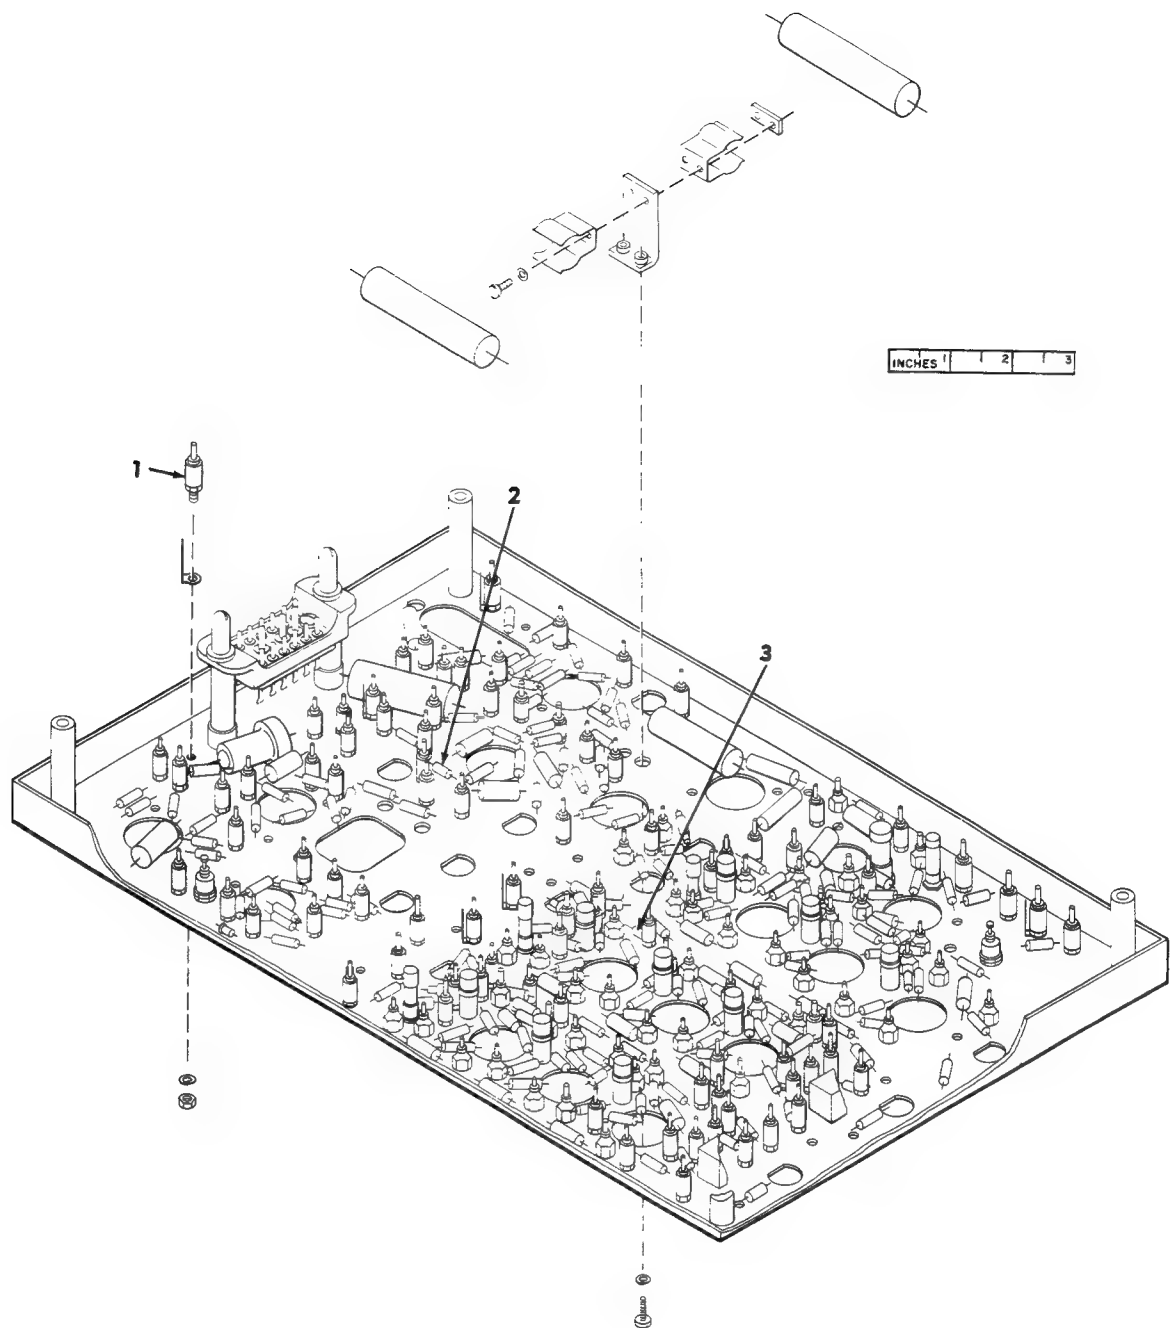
Amplifier-detector (9009562)- partial exploded view
